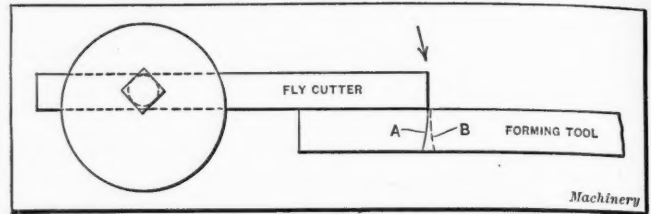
Shape of Tool produced by Fly Cutter and Shape required for Clearance
